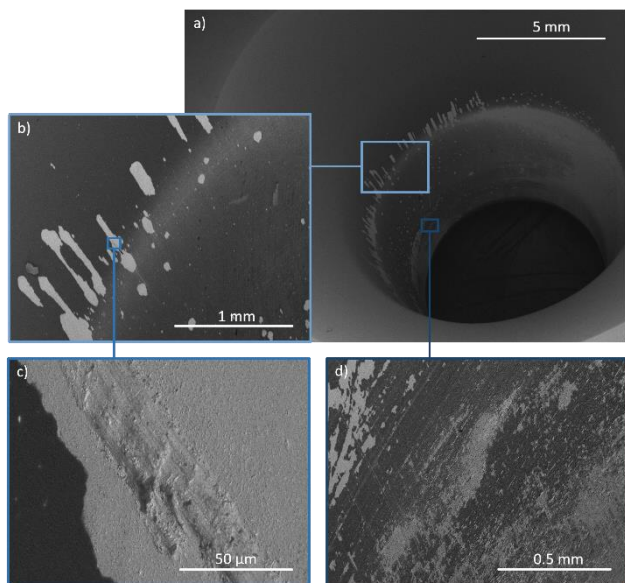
SEM micrographs (BSE) of the wear surface of the coated die, (a) main view with visible “wear ring”, (b) removal of the
